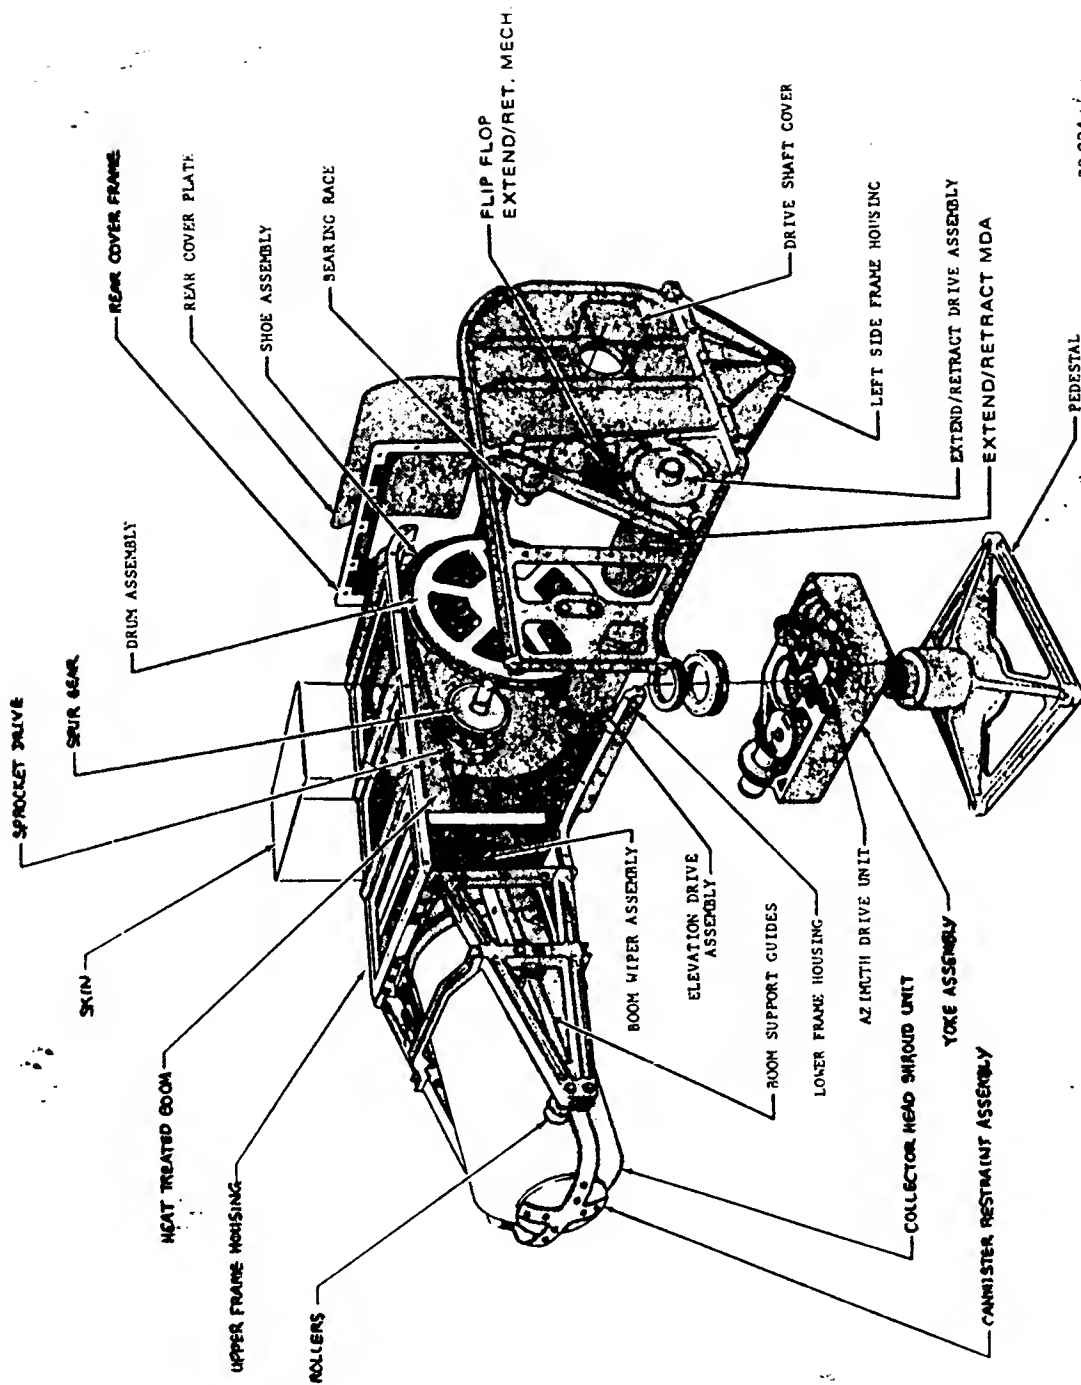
Final Design Surface Sampler Acquisition Assembly.
